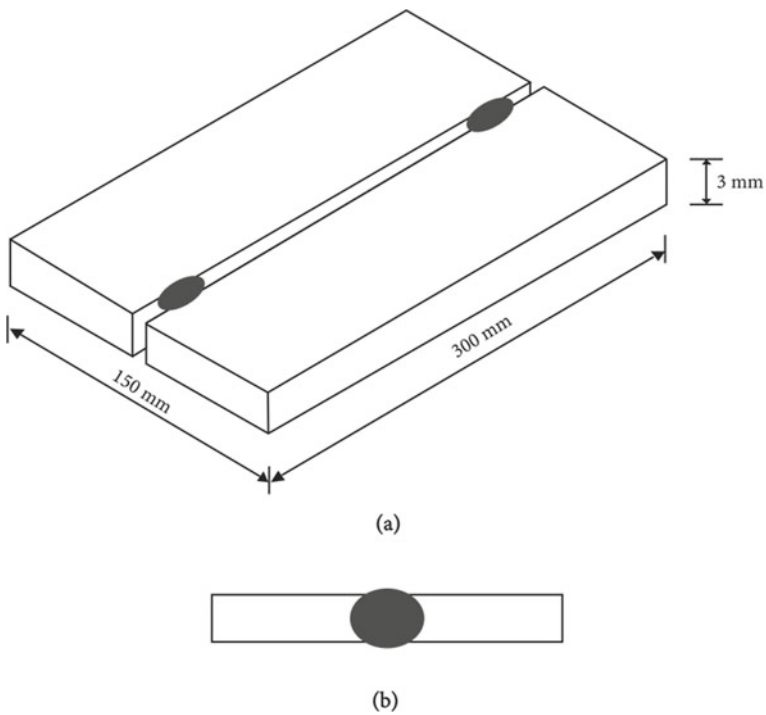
Schematic illustration of the welding process: a the geometry of the welded specimen and b one side of the welding
